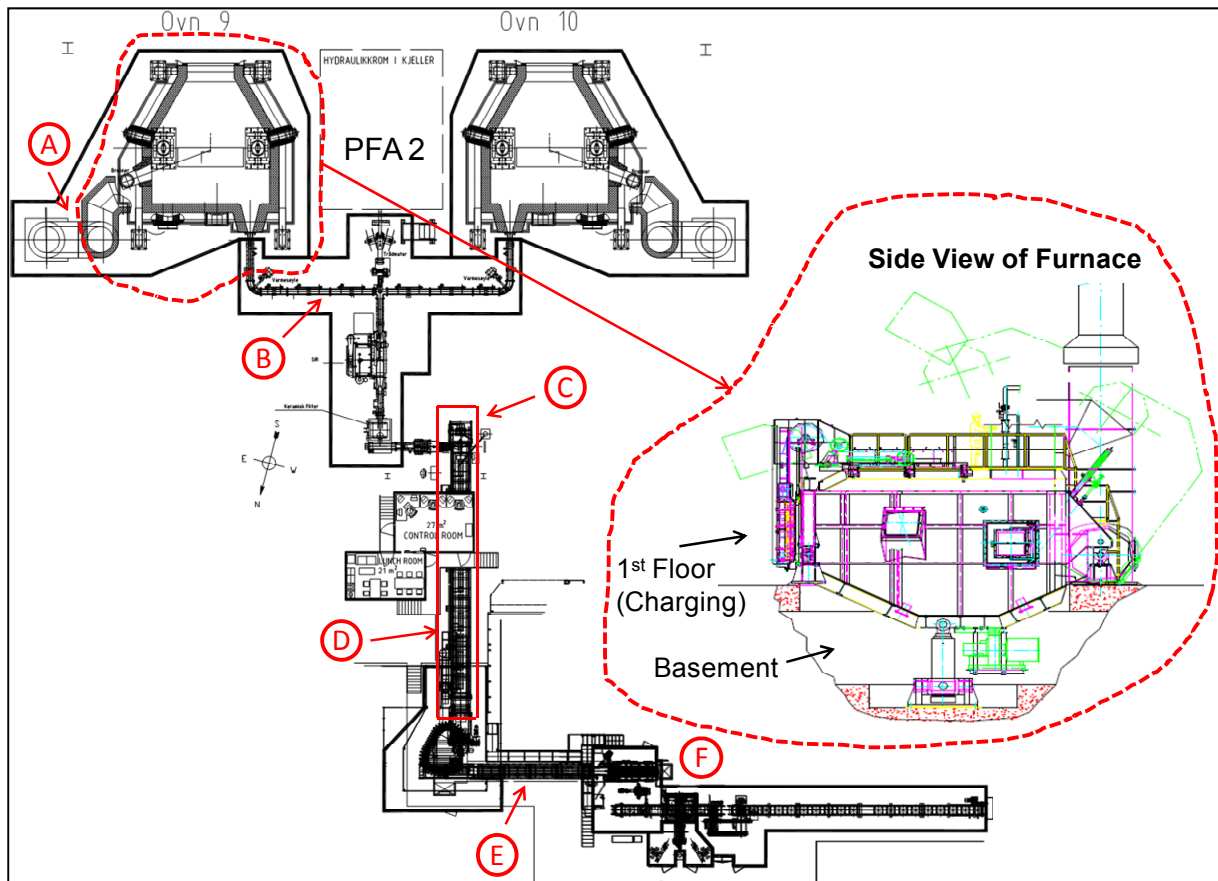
Total view of PFA 2. On top are both furnaces (furnace 9 red dashes framed) illustrated which are connected by launder (B) with casting ingot machine (C to D). (D) and (E) indicate cooling section one and two. (F) indicates the packing and finishing section. (A) indicates the location of flue flow rate and temperature measurement [Hydro 08.1], [Hydro 08.2], [Maerz 06].
